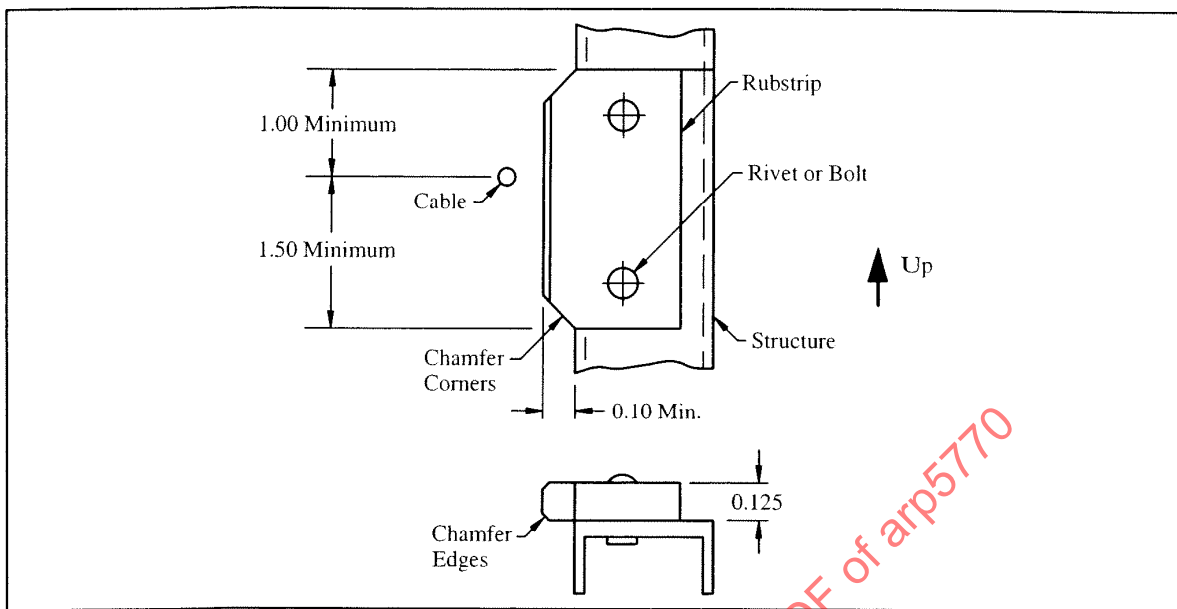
TYPICAL RUB STRIP INSTALLATION
